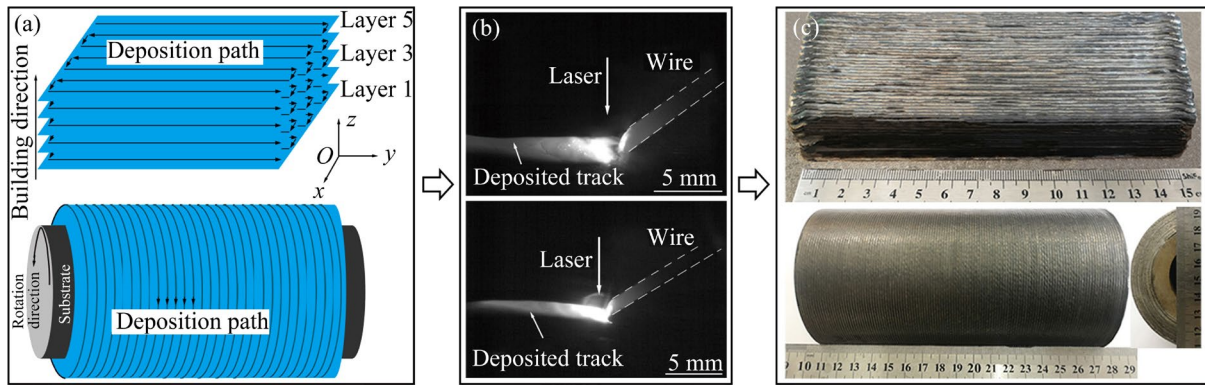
Forming process and appearance of HW-LMD Inconel 625 components: (a) Deposition paths; (b) Wire transfer processes; (c) Appearance of HW-LMD Inconel 625 components
